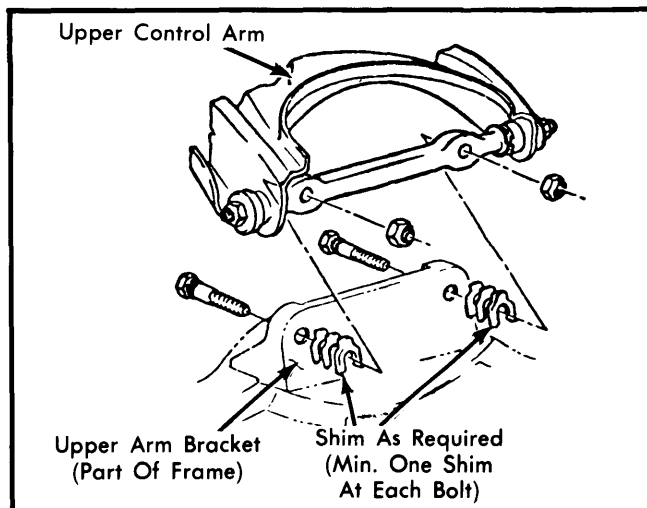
Pontiac Caster & Camber Adjusting Shims
